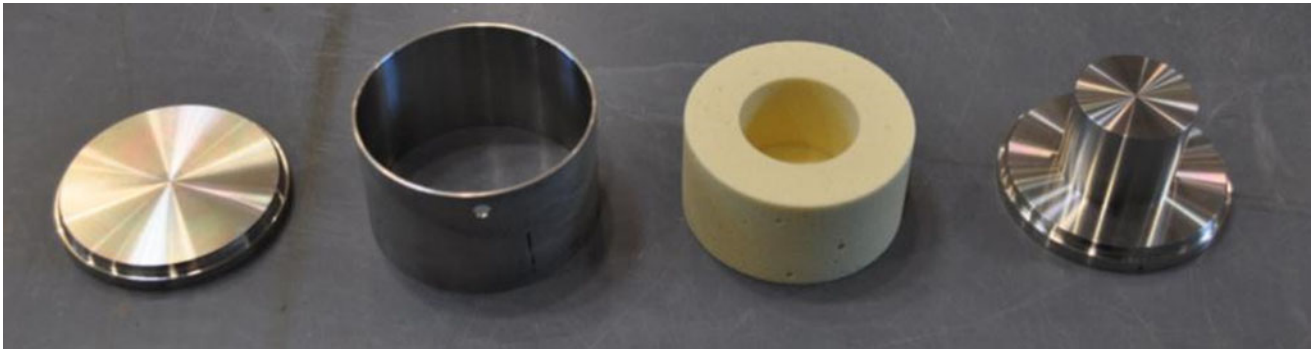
Laser welded can structure geometry before assembling [1]
